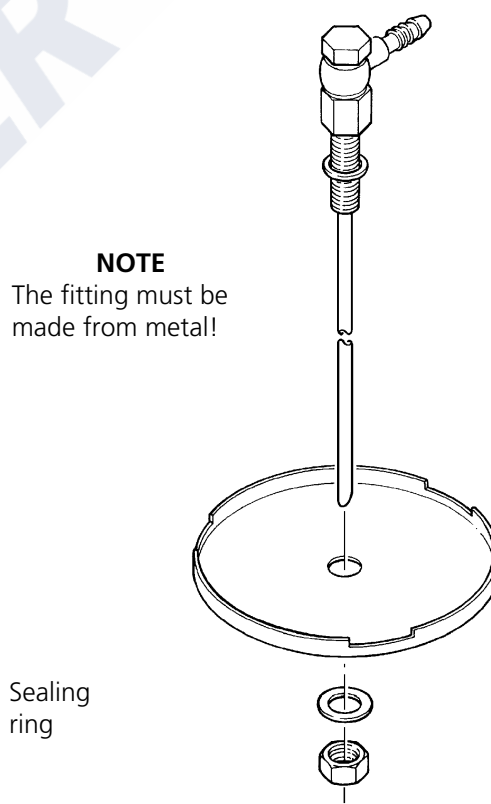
Fuel removal from plastic tank (removal via fuel-tank sending unit)
